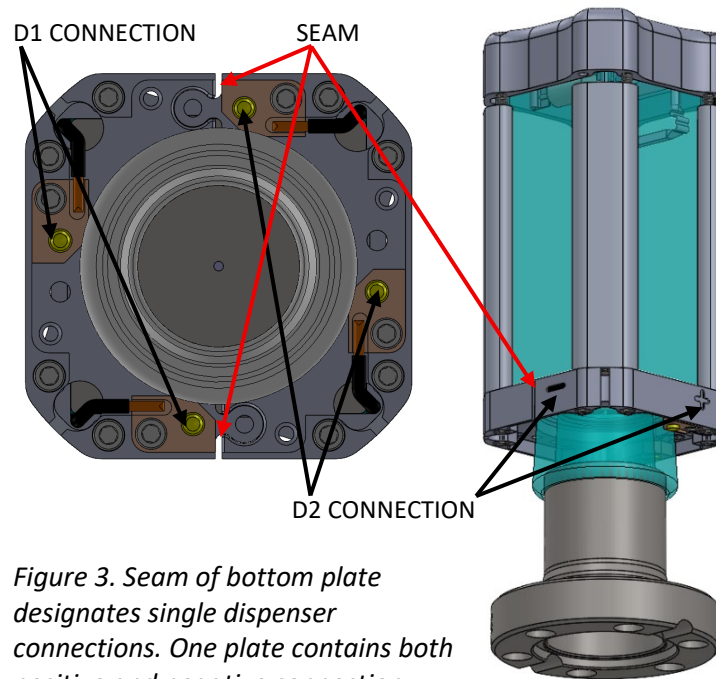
Seam of bottom plate designates single dispenser connections. One plate contains both positive and negative connection points for a single dispenser. D1 is the first dispenser, D2 is the second dispenser. Shown on the CASC where the user would attach the pins.
